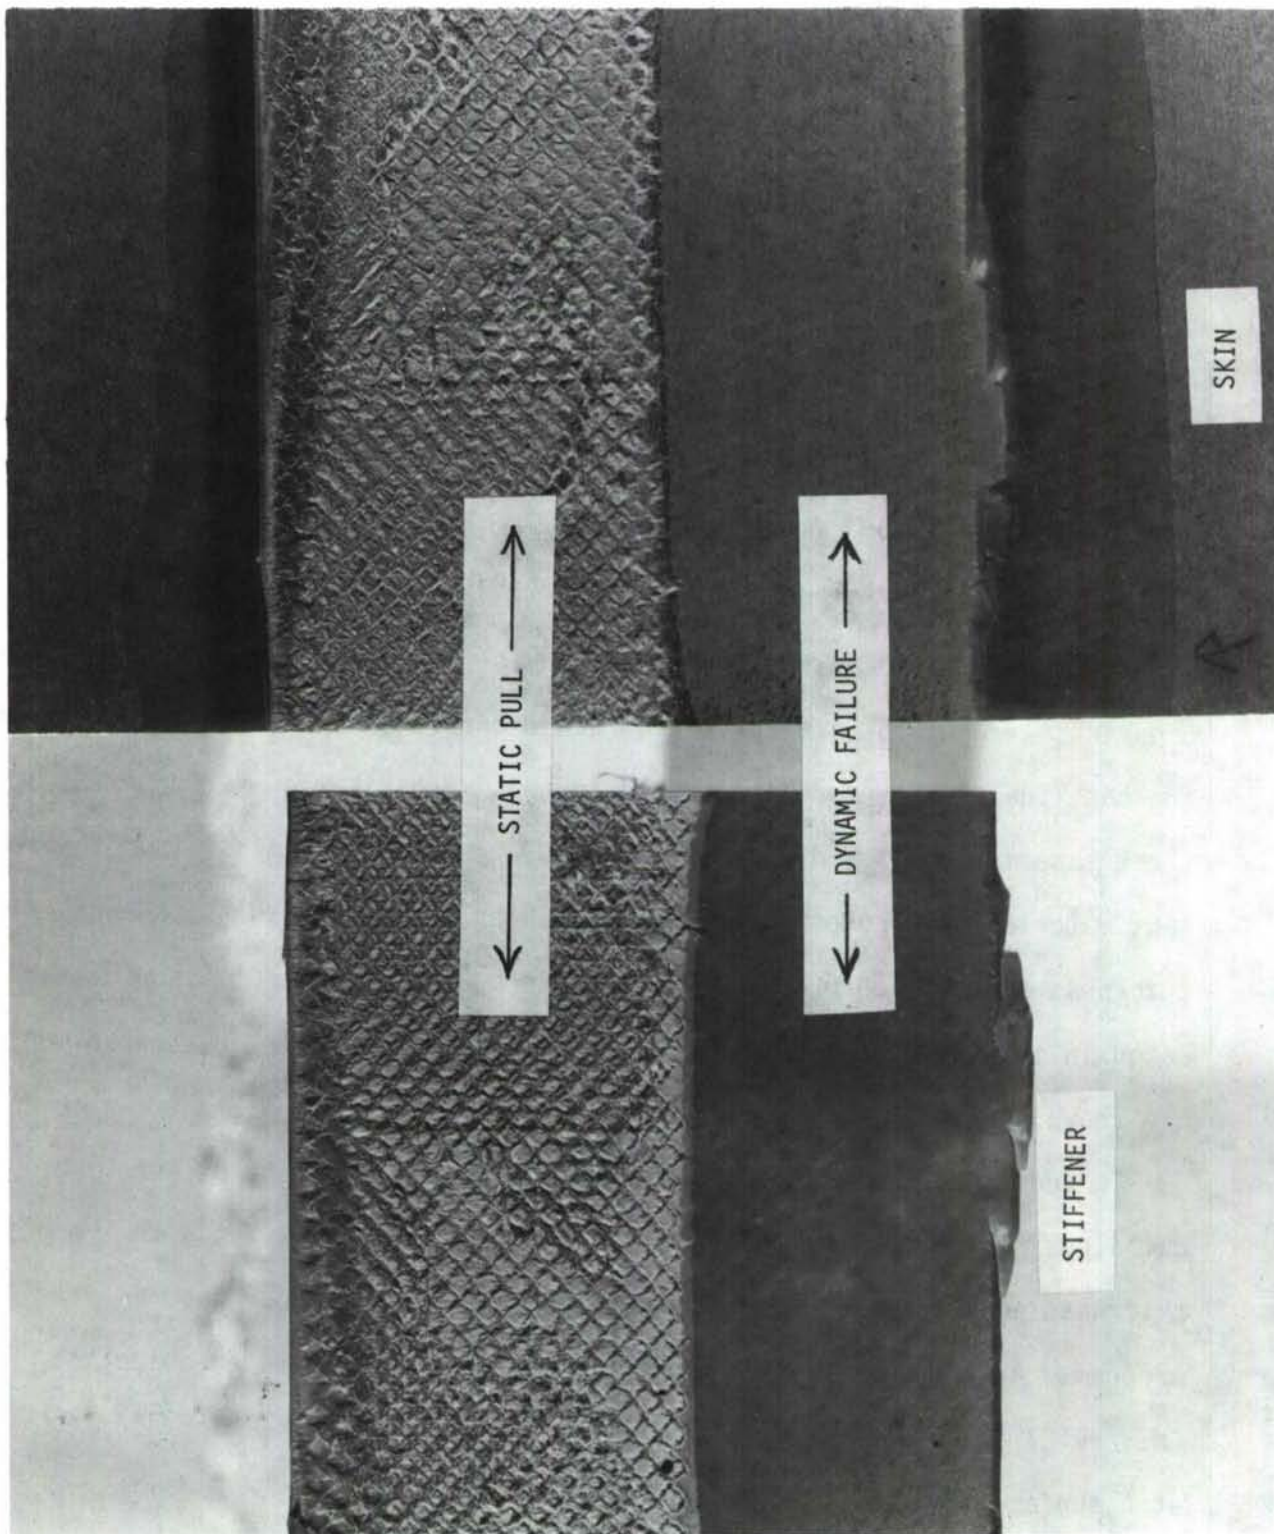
Surfaces of Bonded Joint after Failure
